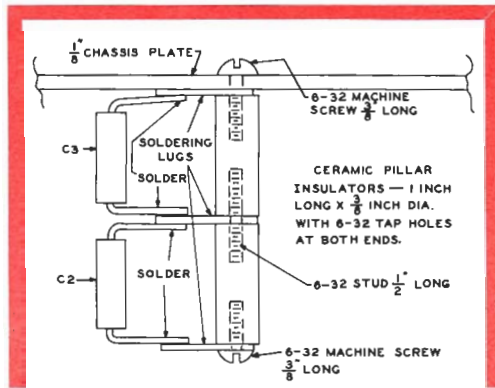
ASSEMBLY DETAIL of the mounting for C_2 and C_3 . Leads were clipped short and bent at right angles, close to capacitor body for rigidity. Threaded stud between pillars was made from 6-32 x $\frac{1}{2}$ -inch machine screw with head removed.
